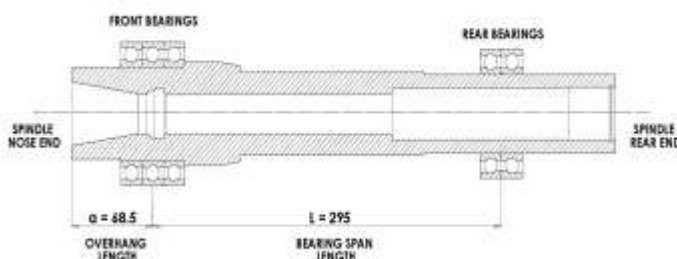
Bearing Arrangement 2 with Span Length 295 mm
